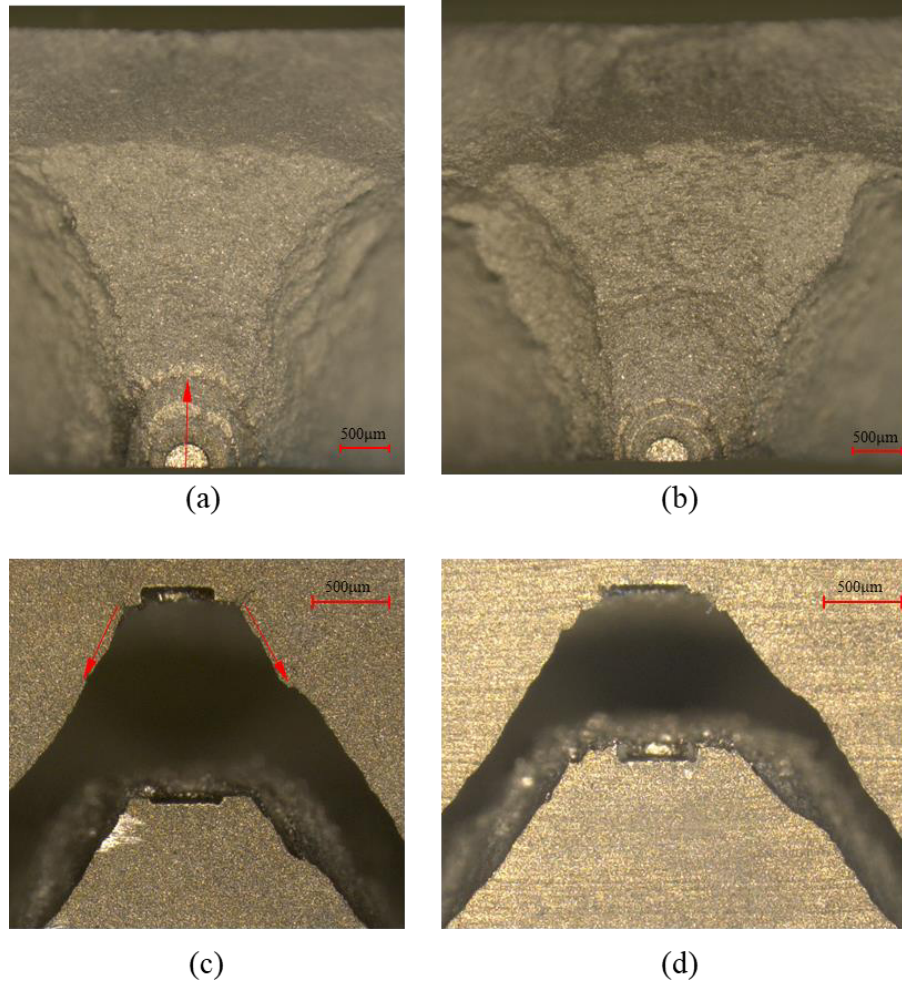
Fracture surface of uniaxial specimen C2 and C3 with marked crack-fronts: (a) Specimen C2 with crack-fronts marked after 49.2 kN and 50 kN; (b) Specimen C3 with crack-fronts marked after 49 kN and 49.5 kN; (c) Crack on specimen surface C2; (d) Crack on crack on specimen surface C3.
